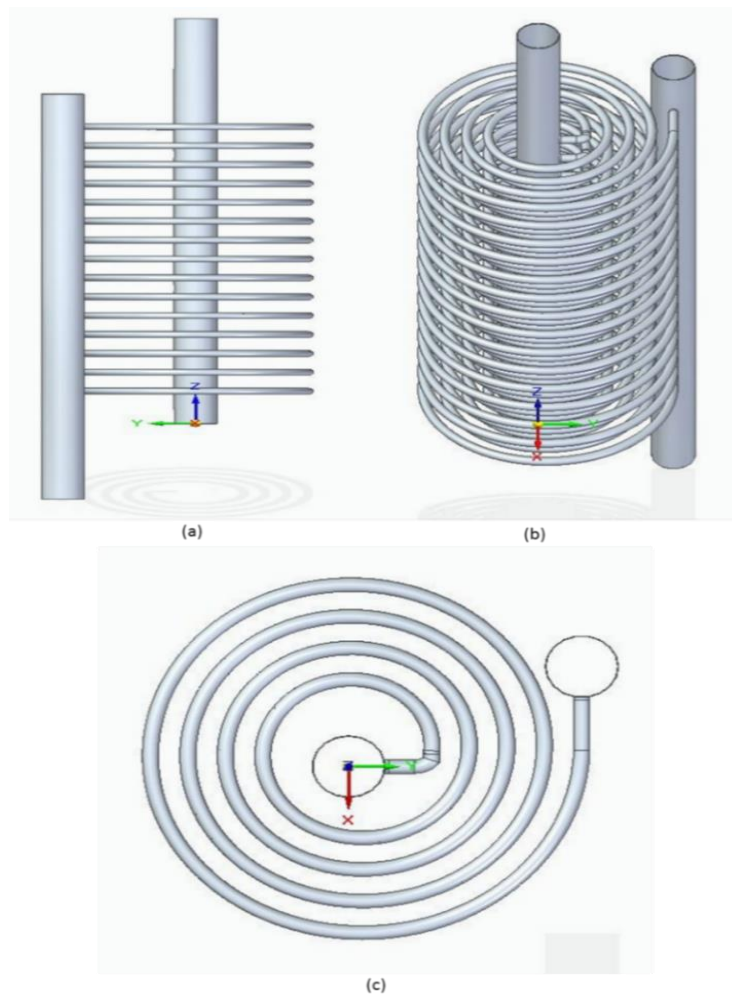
Initial Submerged HX design; (a) Side View, (b) Isometric view and (c) Top view
